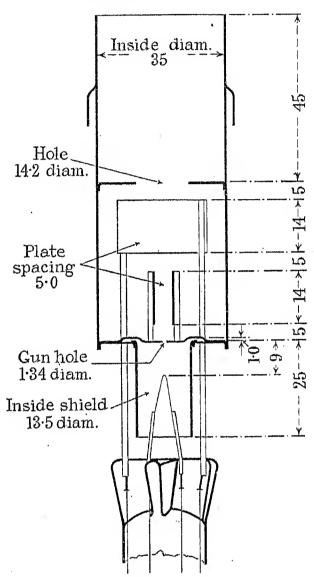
Schematic section of the Cossor cathode-ray tube. (All dimensions in millimetres.)
